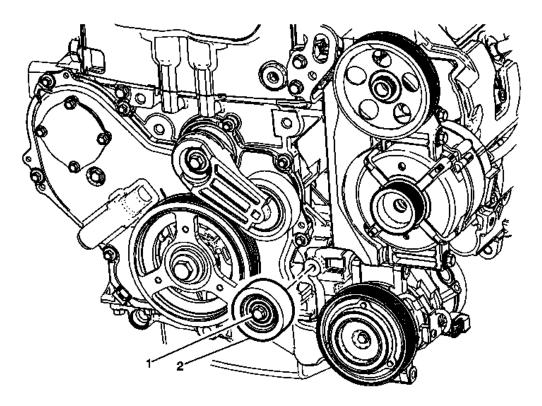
Locating Bolts On Engine Block - Right Side View Courtesy of GENERAL MOTORS COMPANY
